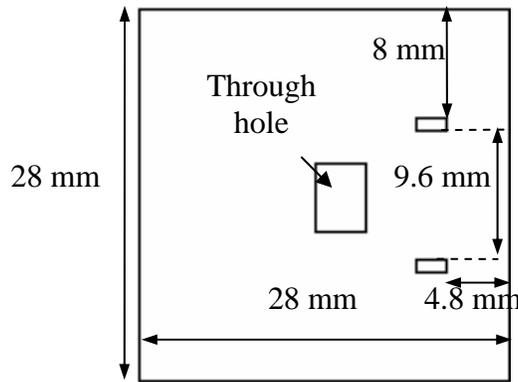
Footprint of the inductor and the position of the electrodes. Windings must avoid the through hole in the structure.
